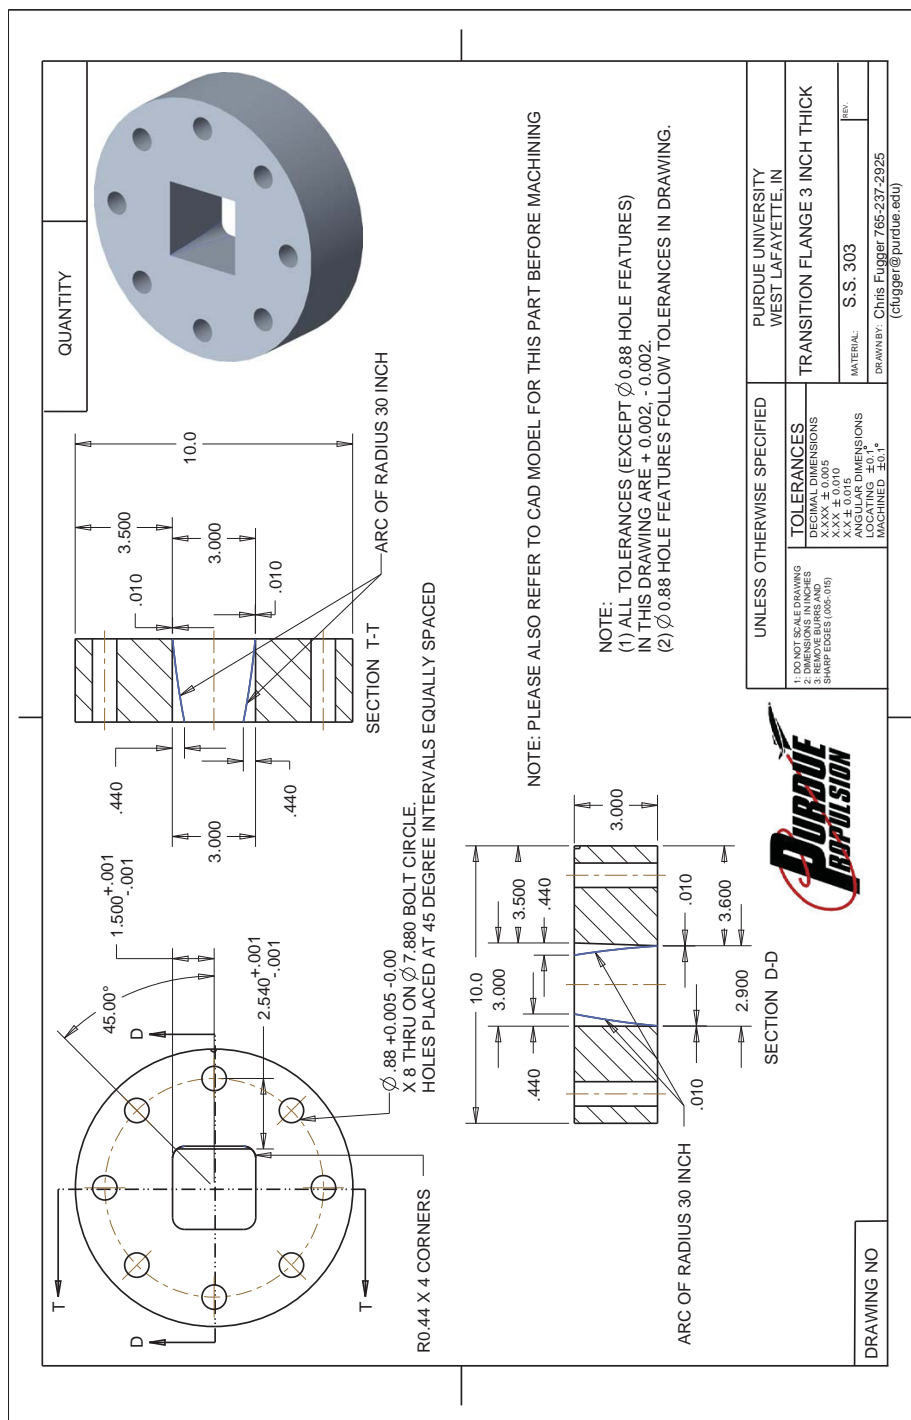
Machine drawing of the crossflow transition section located directly upstream of the combustor optical test section.
